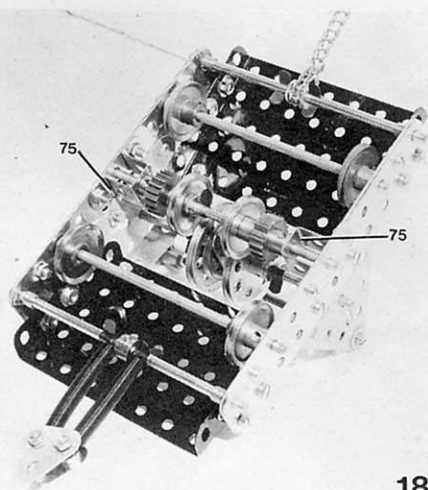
, an underside view of the gantry crab trolley. Note that one of the two Double Bent Strips 75 should be replaced with a Crank
